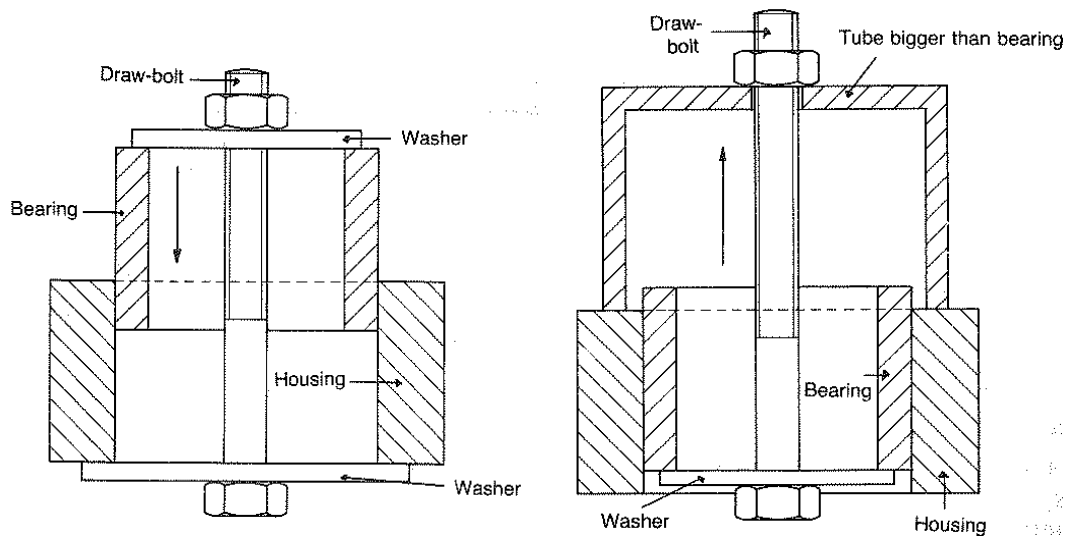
(a) Fitting a solid bearing (b) Removing a solid bearing
